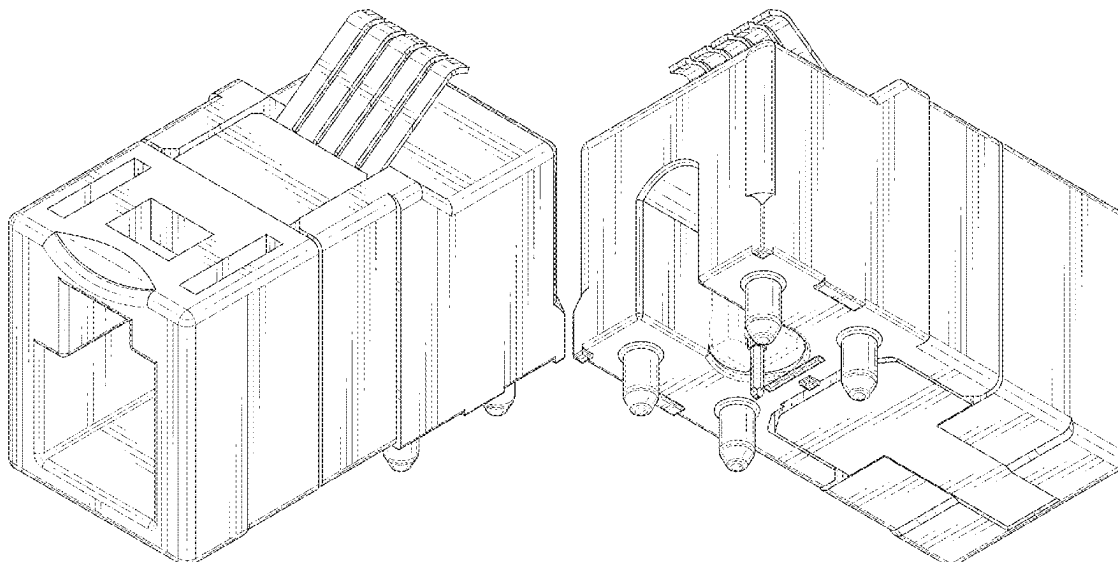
is a rear, bottom, and left side perspective view thereof;
